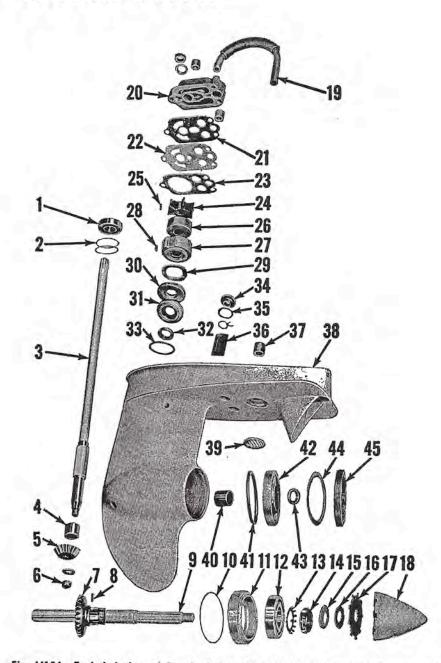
Exploded view of "Quicksilver" gearcase and associated parts used on older models,
